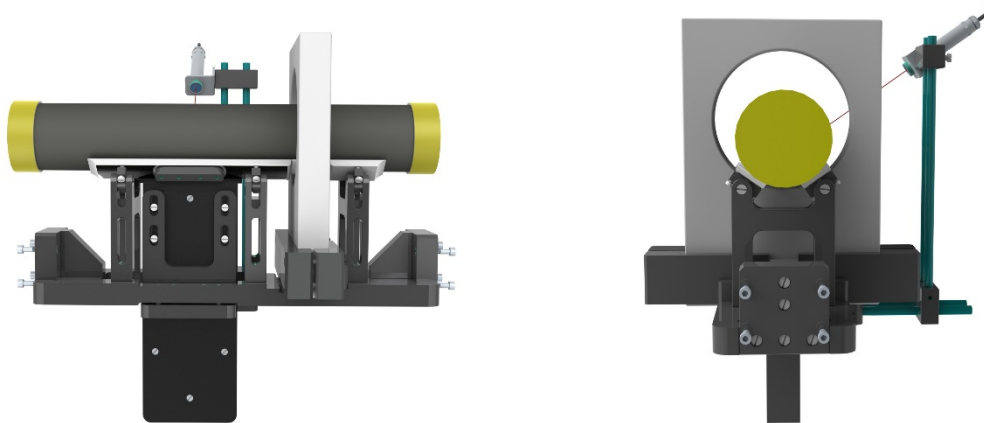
CAD drawing of the central sensor module in side and front view showing the V-shaped stabilization of the section.
